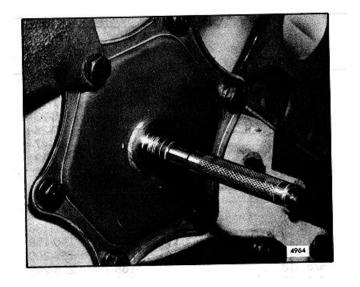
Checking Tachometer Drive Shaft Alignment
